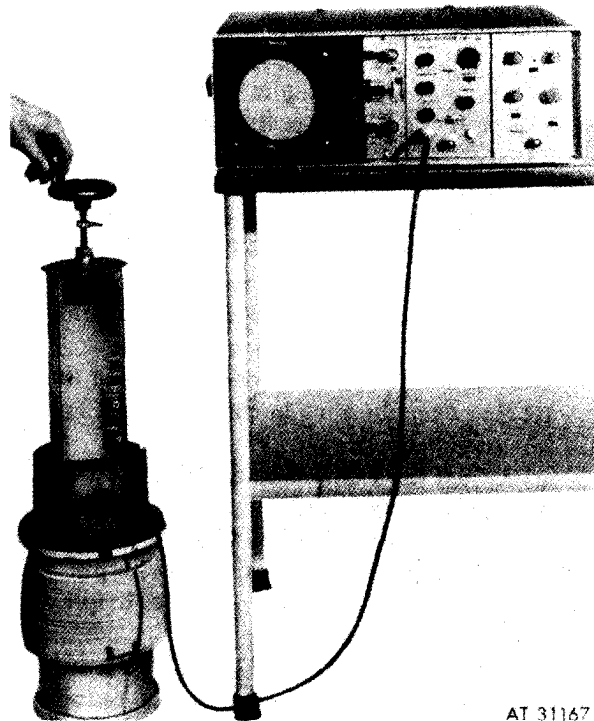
Ultrasonic search fixture installed on master checking cylinder.
